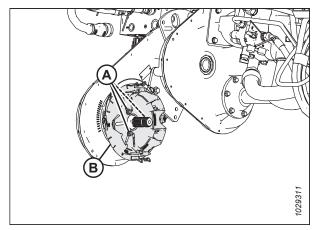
Completion Gearbox Chain Tensioner Cover
